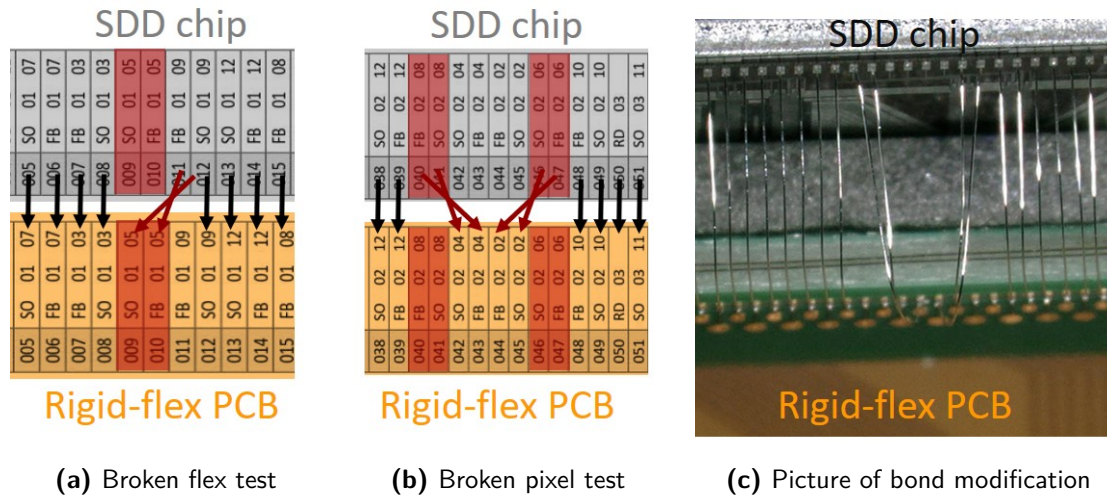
Assembled test of rigid-flex PCB with detector S0-47-4
